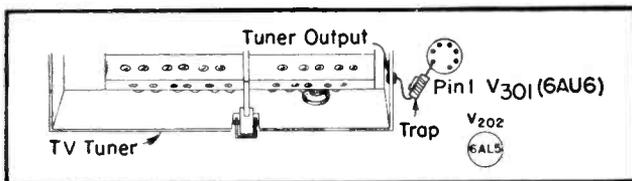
Single-trap installation in Admiral sets, which removes herringbone interference pattern produced by the adjacent lower-channel sound carrier.
